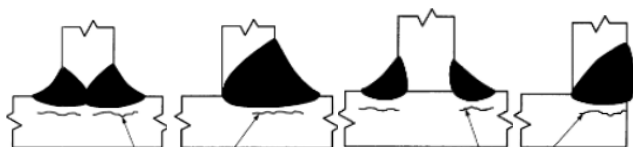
Typical positions for lamellar tearing inside the HAZ in massive weldments.
